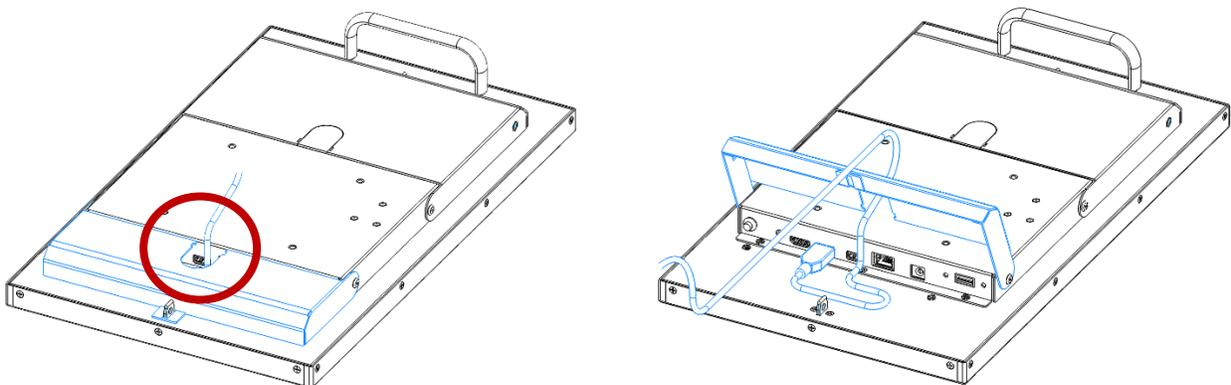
E: SYSTEM ISOMETRIC BACK VIEW, CABLE ROUTING THROUGH BOTTOM COVER
